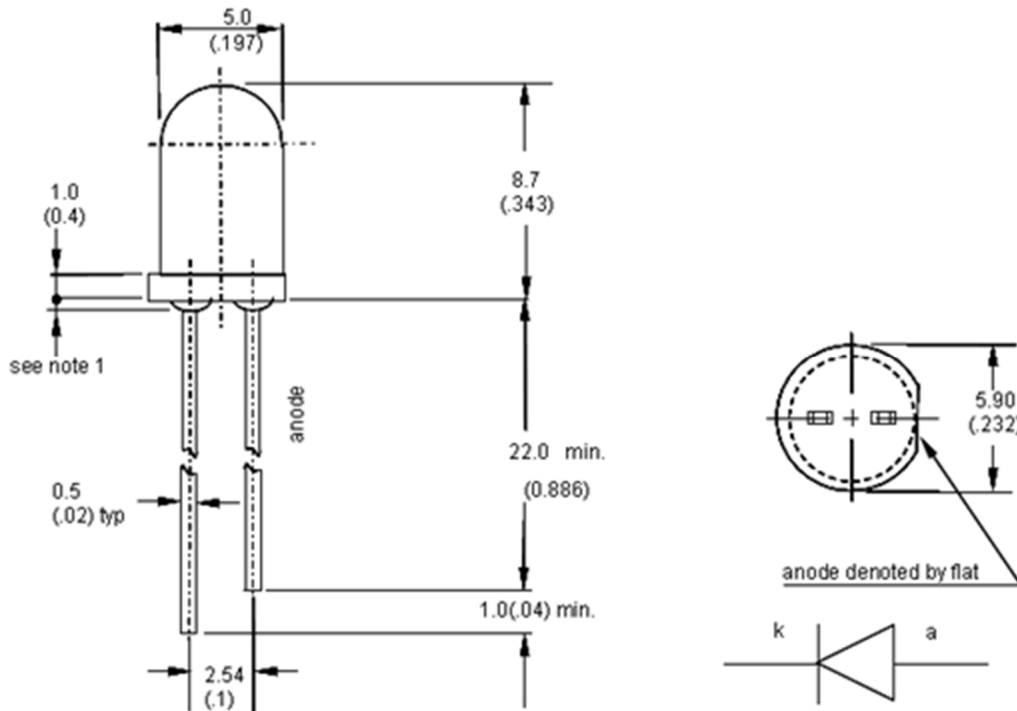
Mechanical drawings of the T1 $\frac{1}{4}$ package
